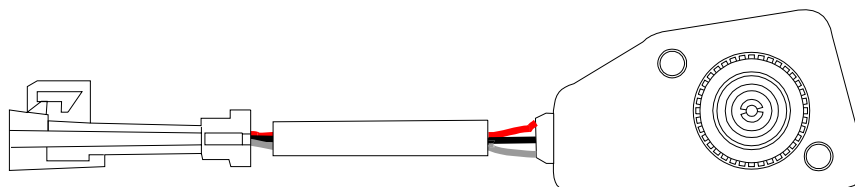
176-1605 Accelerator Pedal Position Sensor with Packard Connector
